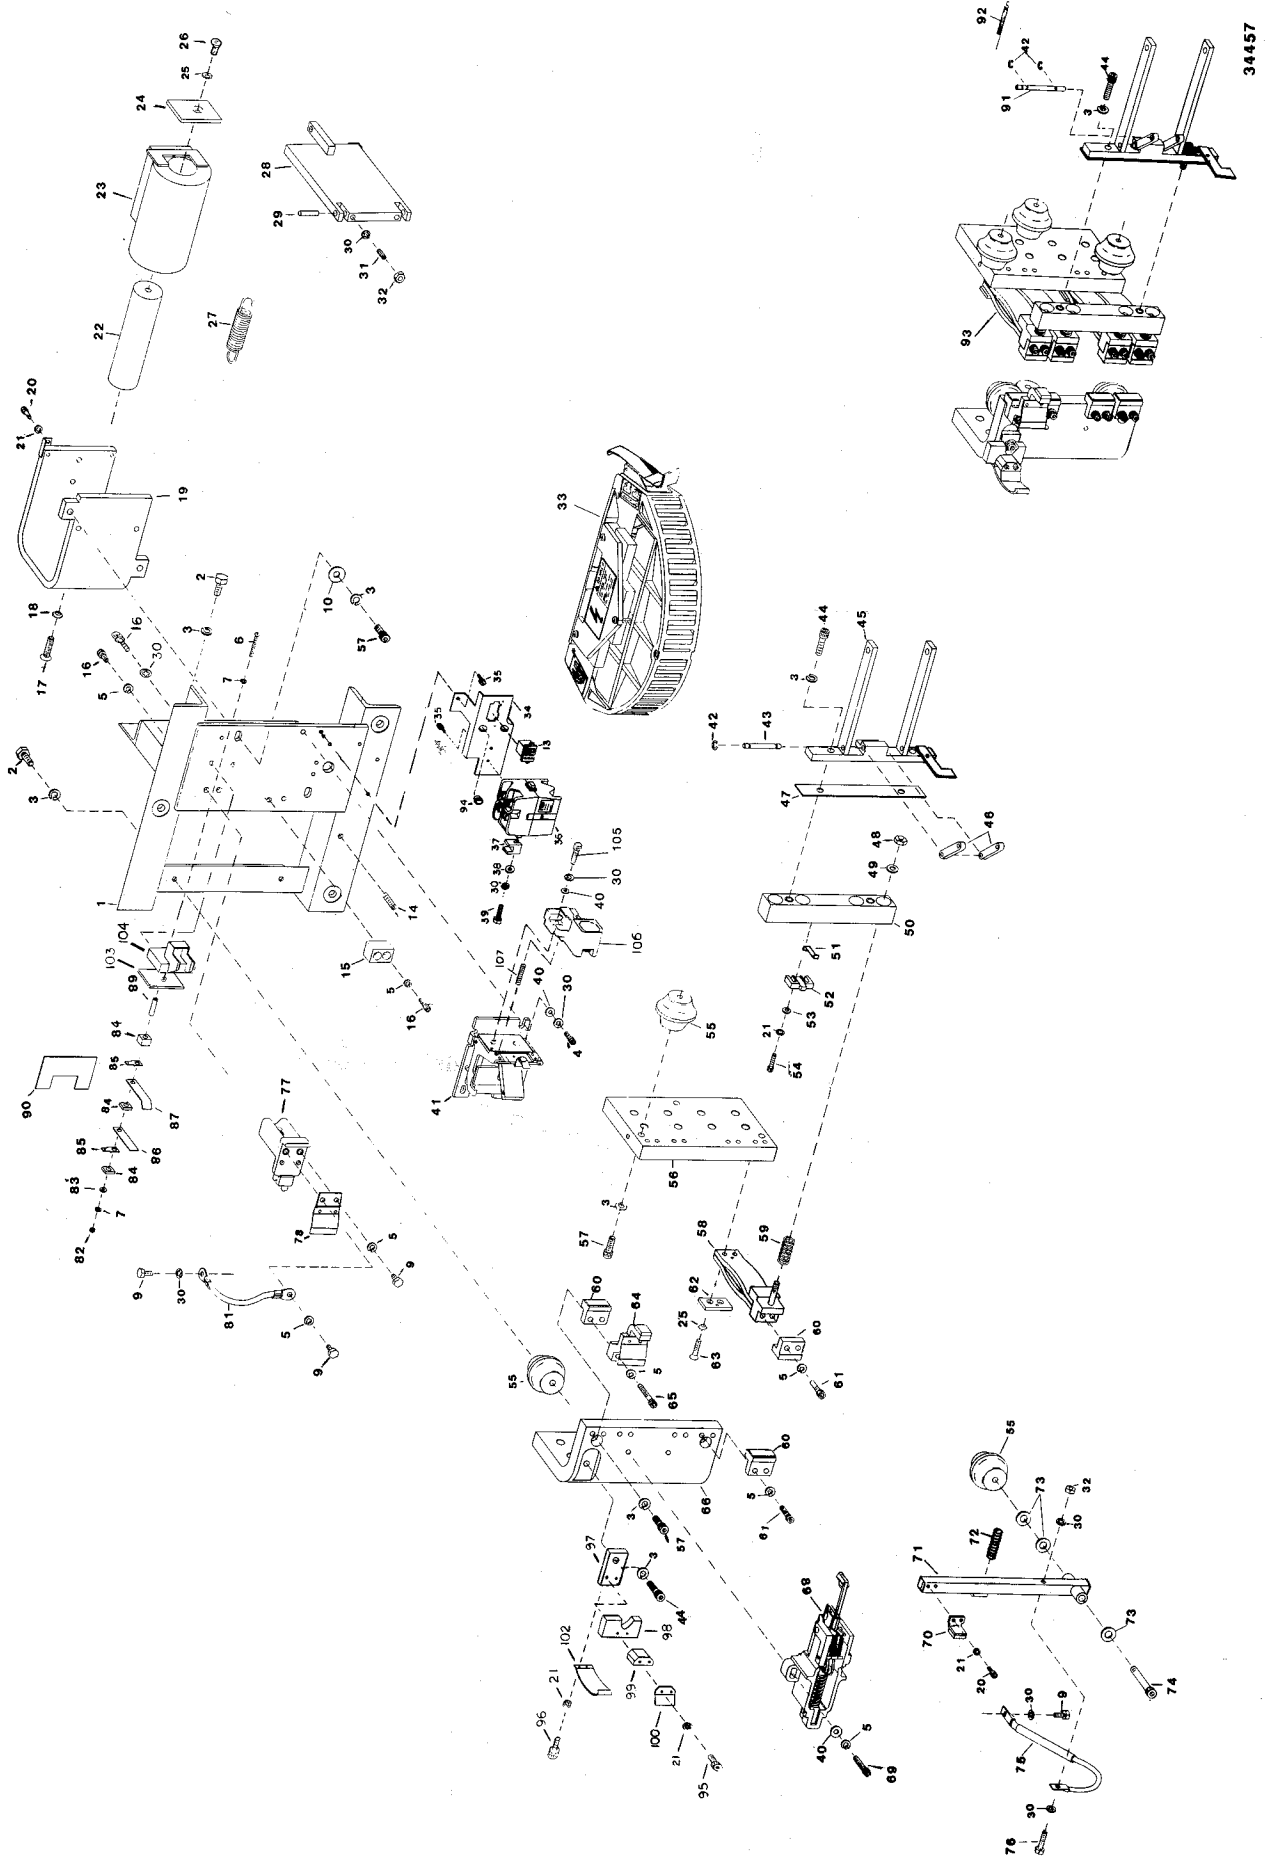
B — Contactor, Exploded View 9579788 (Sheet 1 of 2)
